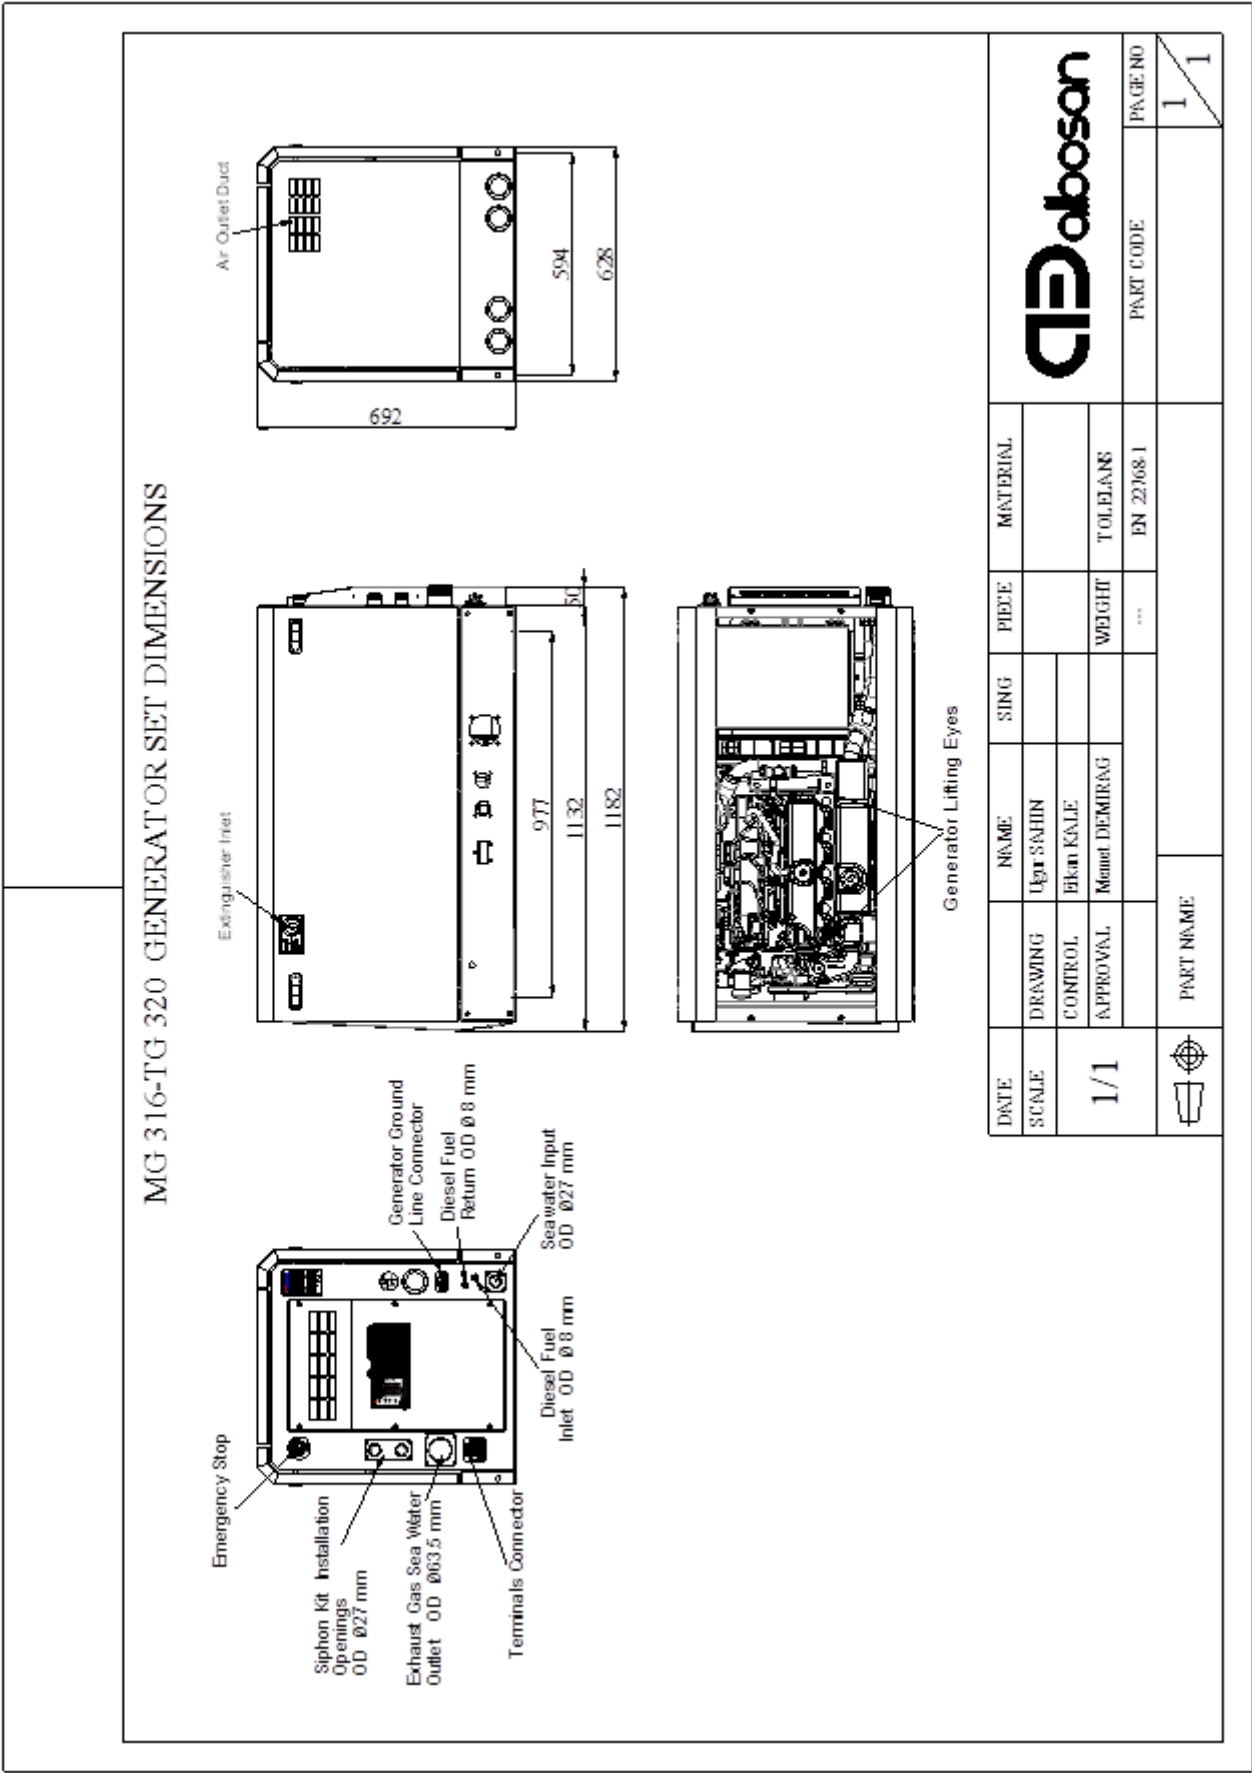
GENERATOR SET DIMENSIONS - MG 316, TG 320
